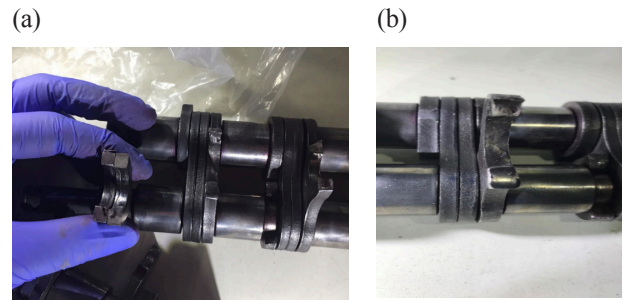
(a) Link plates of the drive chain involved in the Langham Place incident, broken from the cracks shown in Figure 2(b); and (b) enlarged view showing signs of fatigue failure on the fracture surface of a broken link plate. Photos taken by first author on 2 February 2018 at EMSD.
